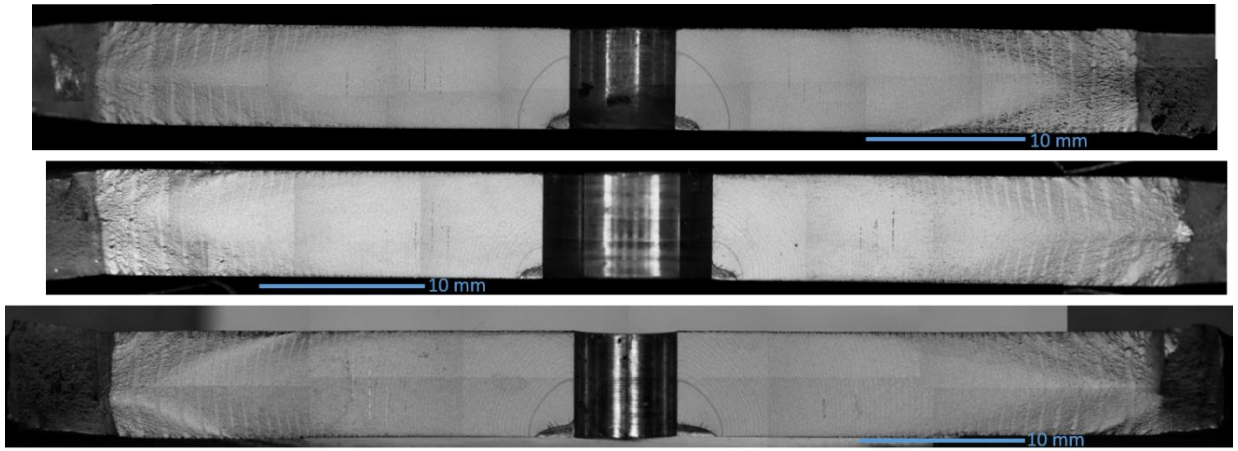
Fracture surfaces of the three symmetric quarter-elliptical corner cracks at a center through hole
